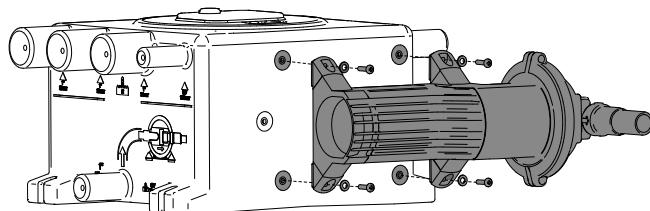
Attaching Gulper 220 to the Grey Waste Tank
